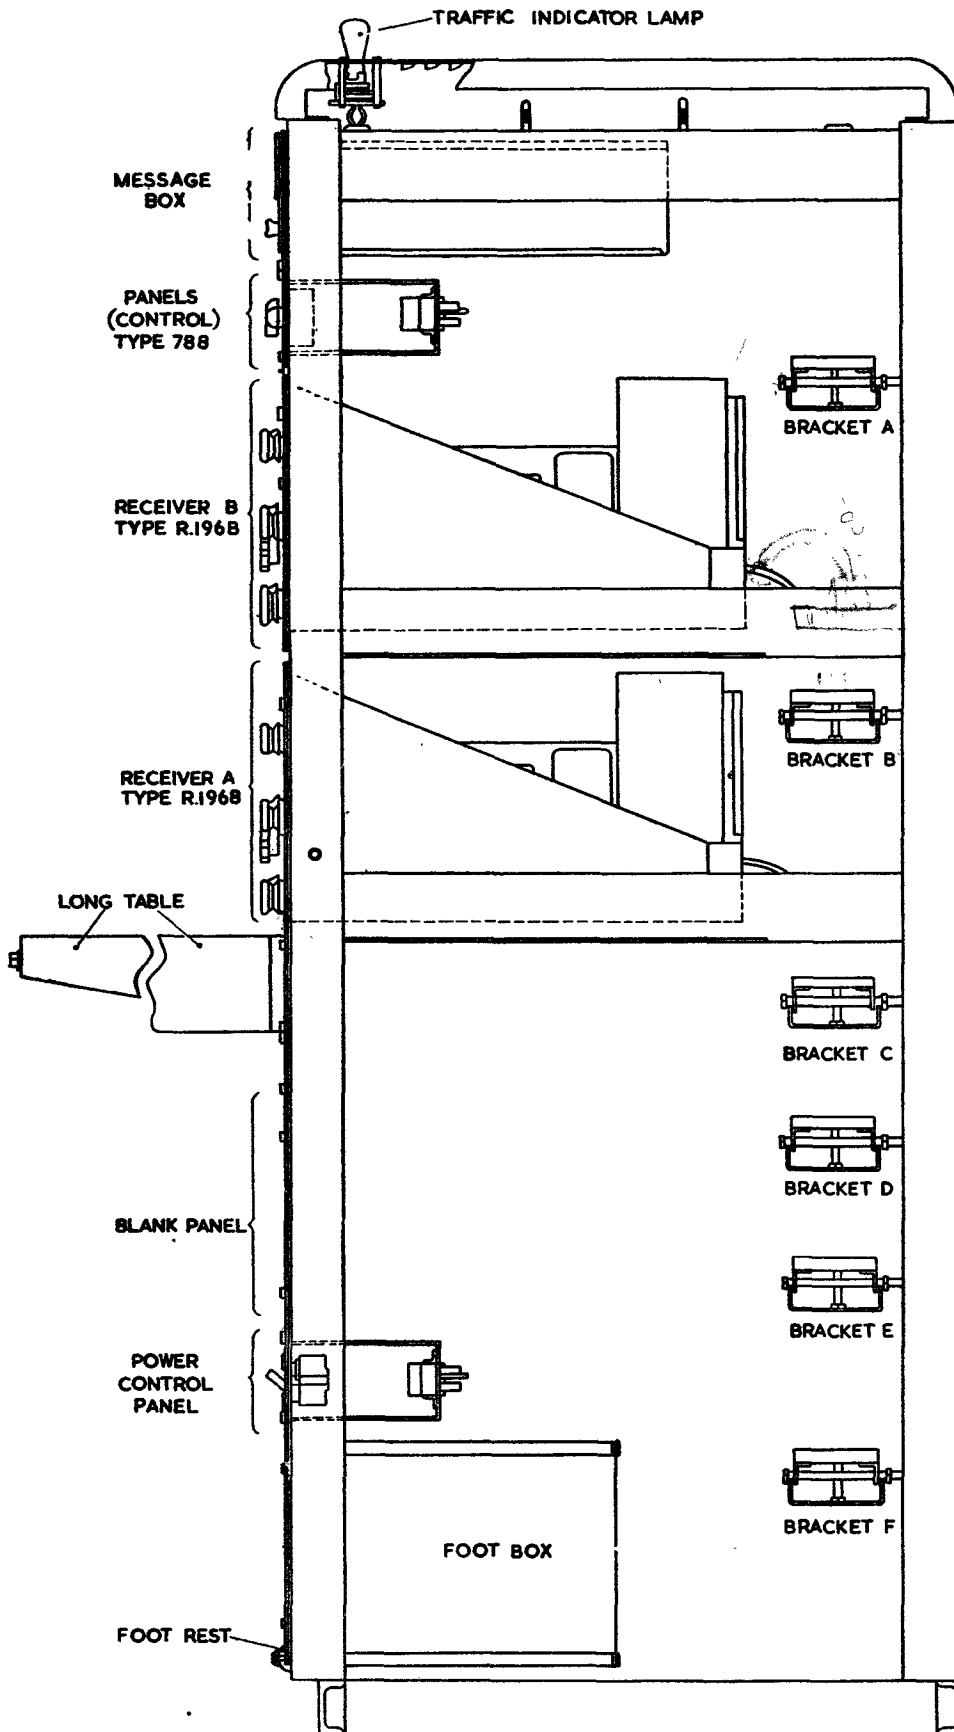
Side view of rack assembly Type 243, with side panel removed
